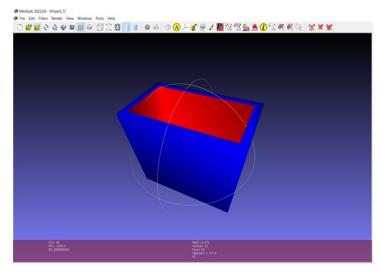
The drawing of the distributor from the continuous casting machine made in the Meshlab program
